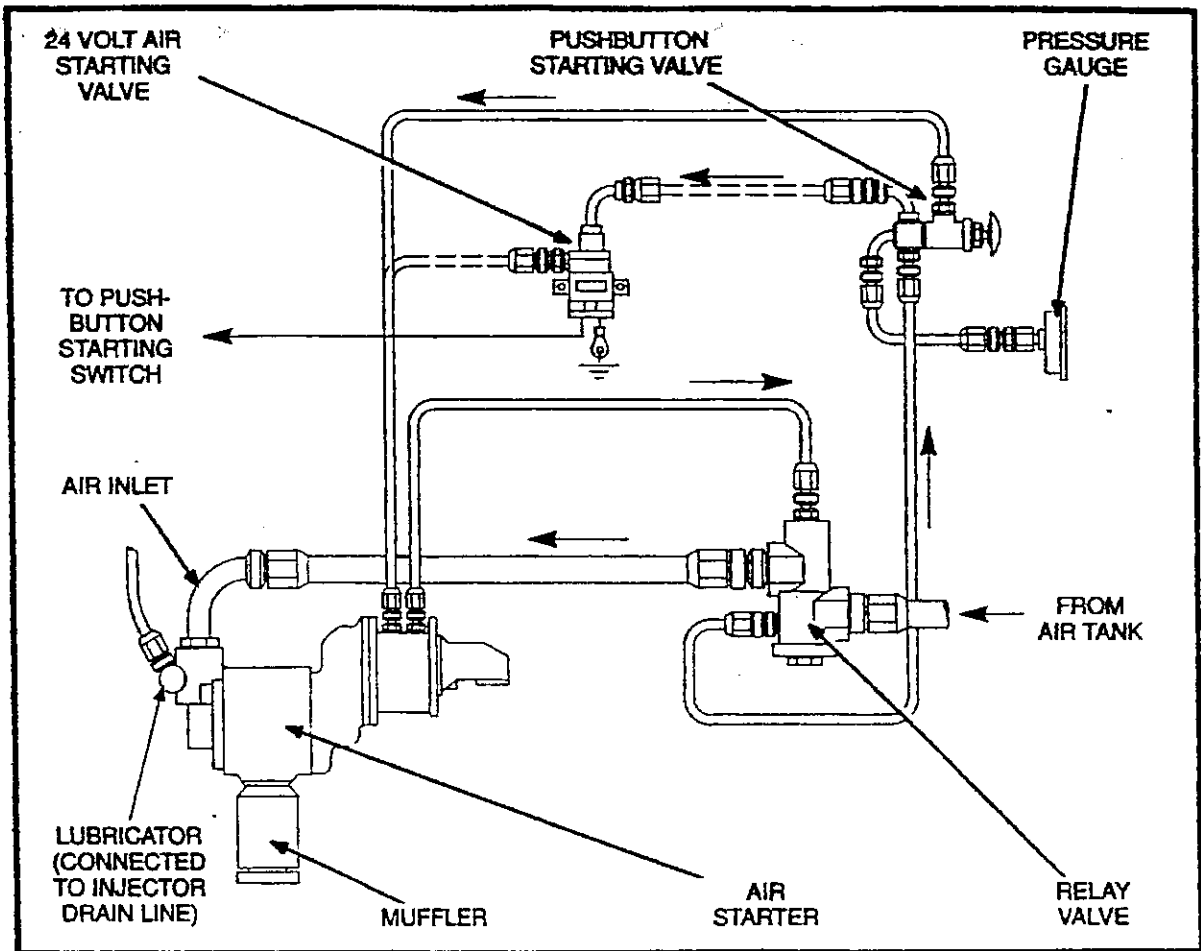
TYPICAL PIPING ARRANGEMENT FOR AN AIR STARTER
